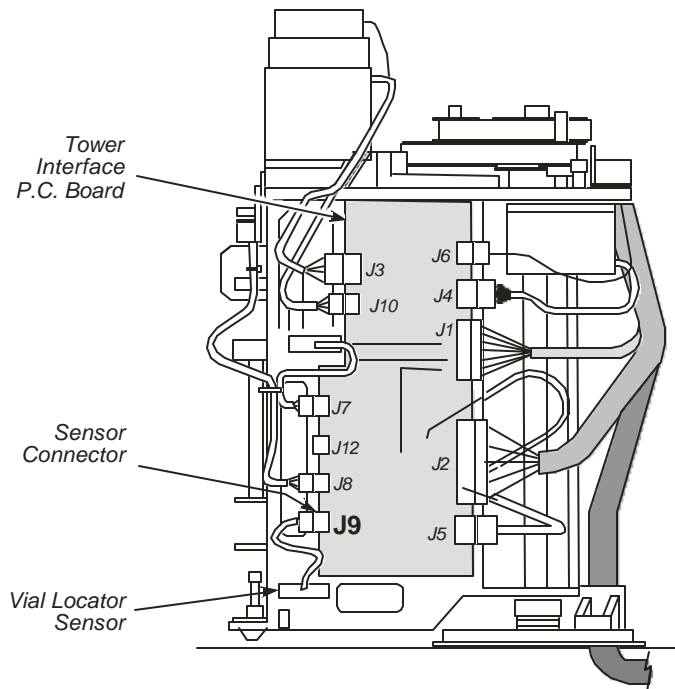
22 Location of the Vial Locator Sensor and Sensor Connector
